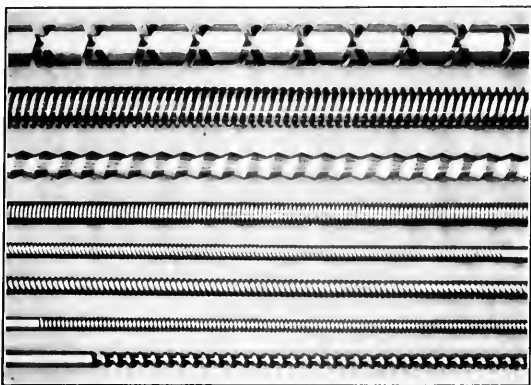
Examples of Work done on Universal Screw Cutting Machines
